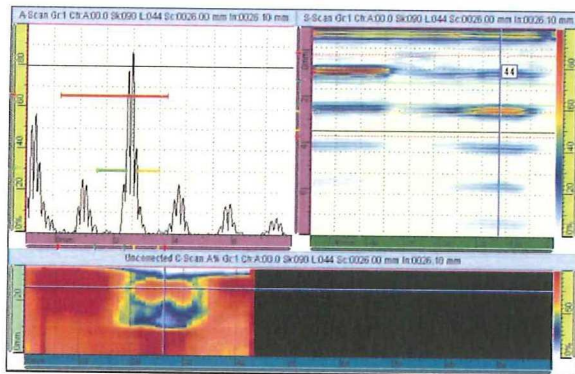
PA scan of sample clip USW141117-03 welded with 2,000 [J]. The weld quality is excellent near the upper edge, but poor near the lower edge.
